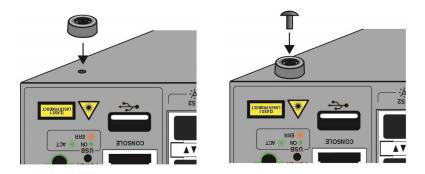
Attaching Bumper Feet on the x330-52GTX Switch
